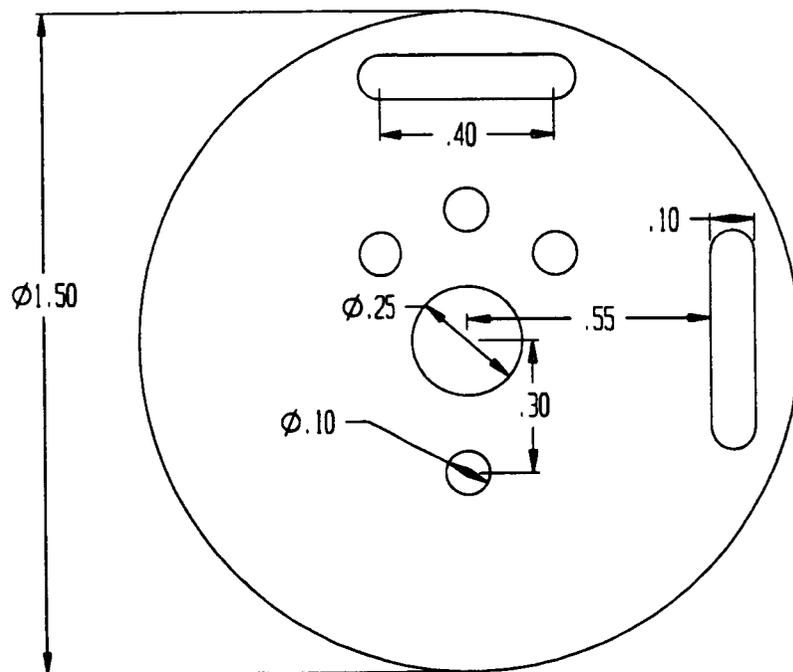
Motor Mounting Bracket - Machine Drawing
